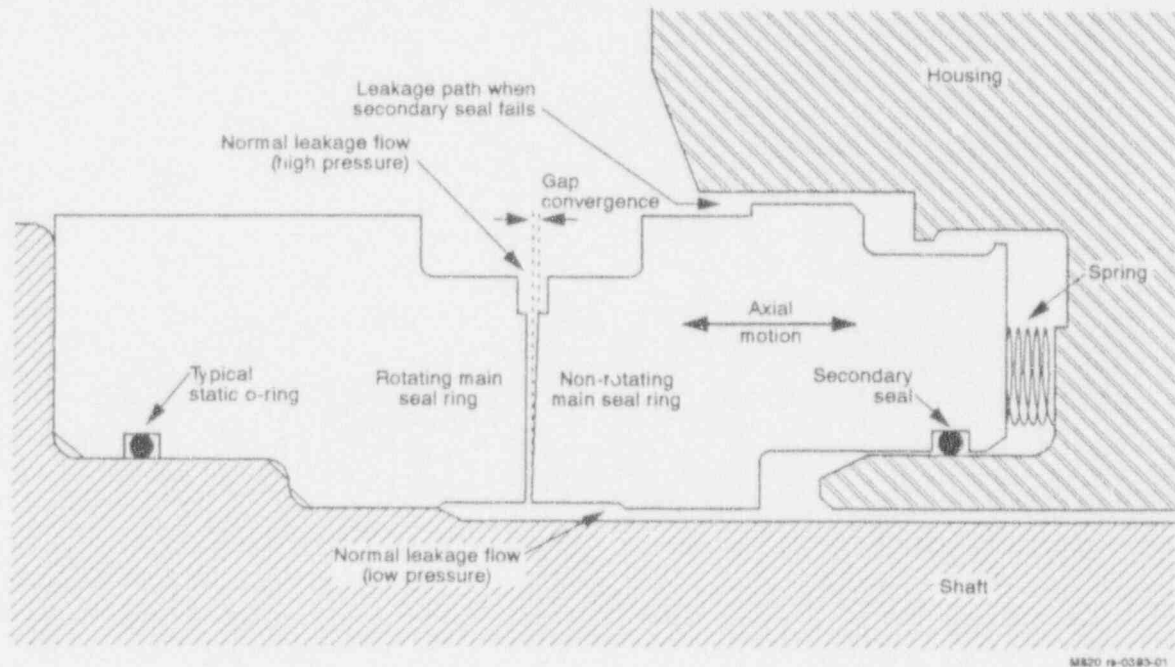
Simplified diagram of a cross-section of an RCP shaft seal; this represents one of the three or four seals that constitute the entire seal assembly.
